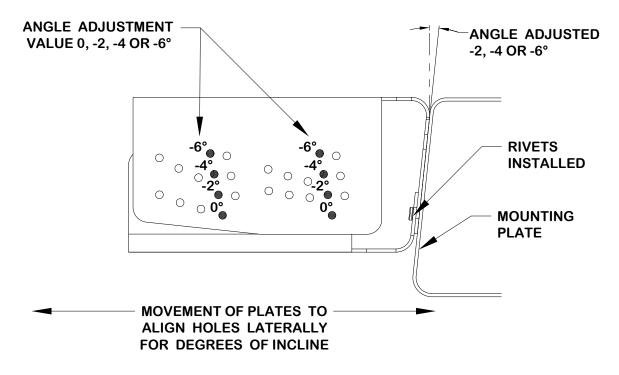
GMU 44 Universal Mount Hole Alignment, Lateral Method (Side Plate Mounted)
